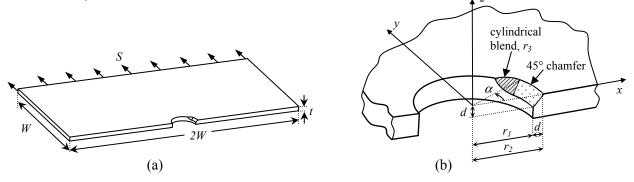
Geometry for hole in a large 3D plate with multi-arc blend on one side of hole: (a) plate dimensions and loading, with only ½ section shown, and (b) local details around blend.
